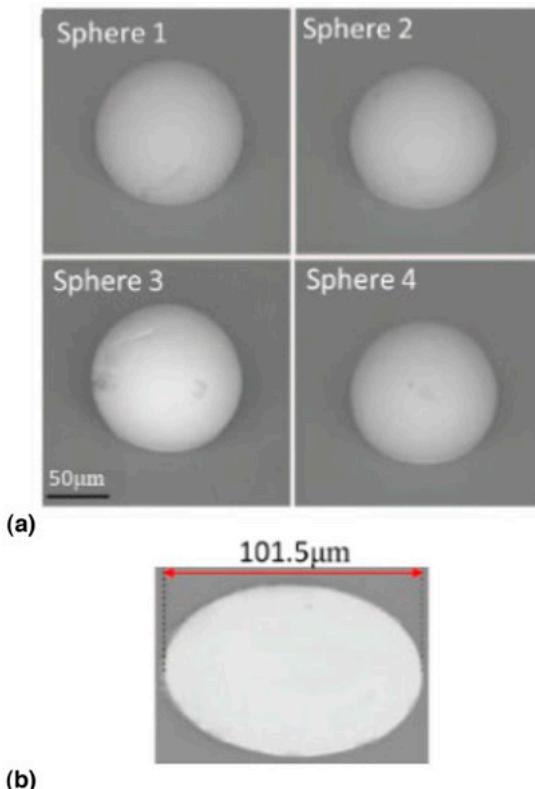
(a) Top view of the SAC solder spheres. (b) Pad geometry.
